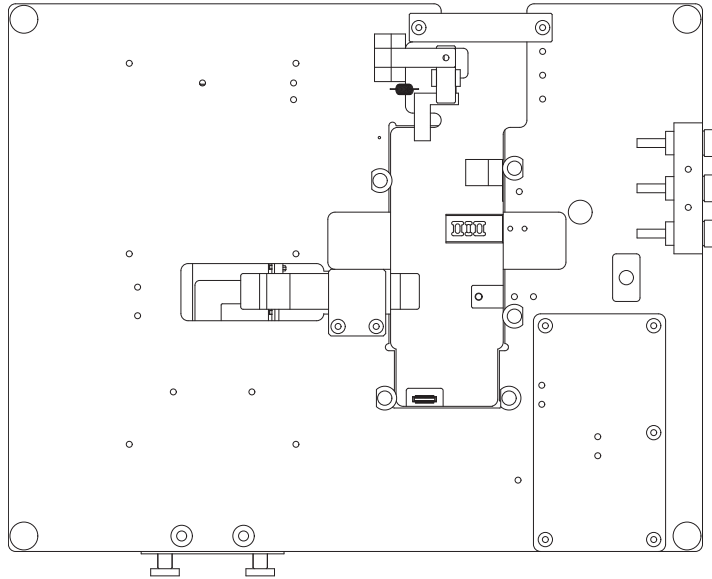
Covert Board Debugging Fixture with Flexes, Housing and Display (Back)
